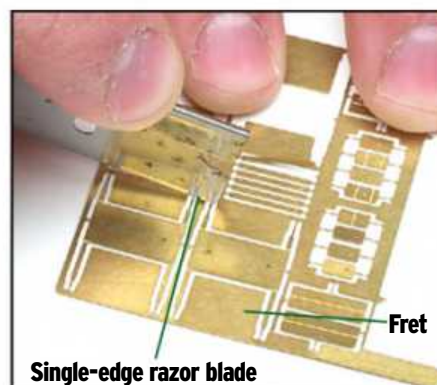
CUTTING THE PARTS. Cody used a fresh single-edge razor blade to cut the brass parts from the fret. Always cut brass parts on a hard surface, such as plate glass.
